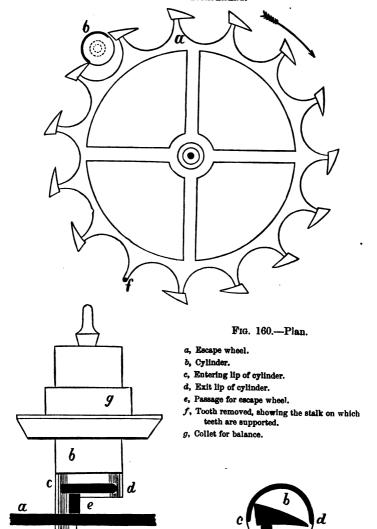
Elevation of cylinder and one tooth of escape wheel therein.
